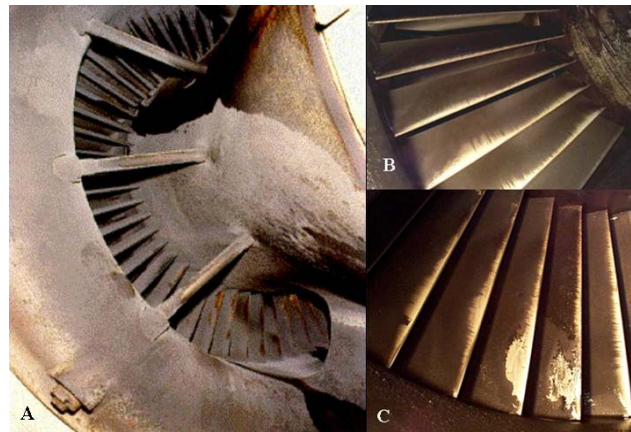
Examples of Fouled Compressor Blades: (a) Heavily-Fouled Air Inlet Bell-Mouth and Blading on a 35 MW Gas Turbine; (b) Oily Deposits on Blading; (c) Compressor Blades Fouled with a Mixture of Salts and Oil (Courtesy, Turbotect Ltd.)
